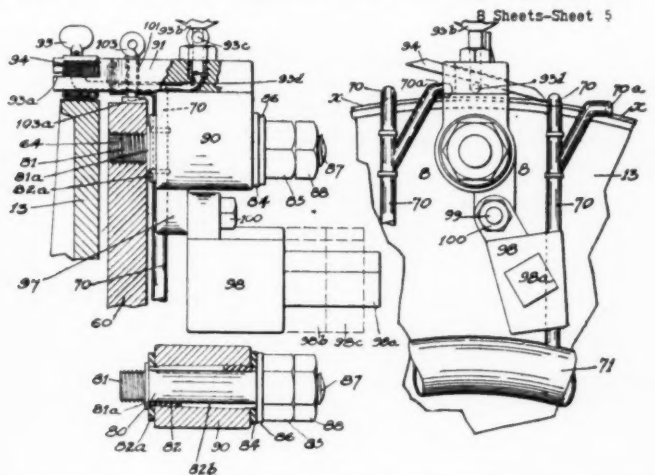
DETAILS OF TOOLHOLDER OF MACHINE SHOWN IN FIGS. 7 AND 8
